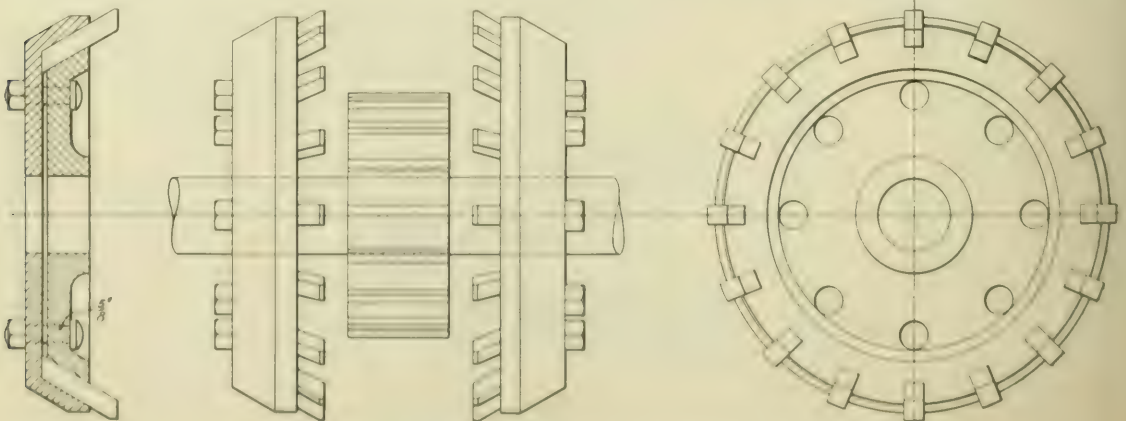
Gang Milling Cutter for Shoes and Wedges and Crosshead Gibs.
